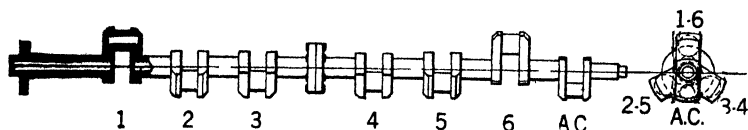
Two-section Crankshaft for Six Cylinder 4-Cycle Marine Diesel Engine
